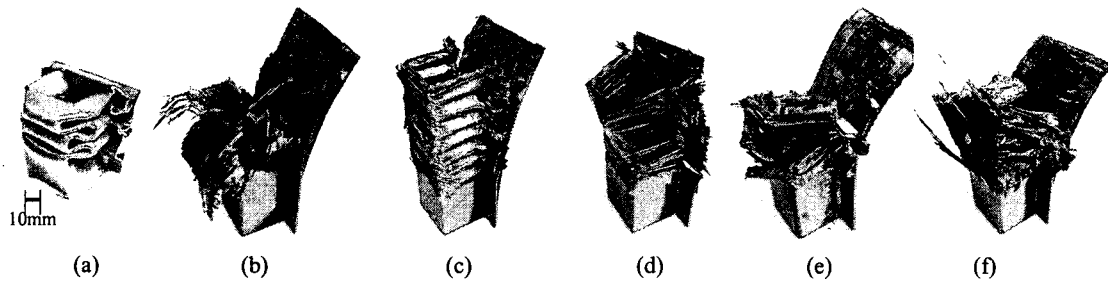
The Collapse mode of specimens: (a) spot welded member (b) CFRP side member, [+15/-15]₄ (c) CFRP side member, [+45/-45]₄ (d) CFRP side member, [90]₈ (e) CFRP side member, [0/90]₄ (f) CFRP side member, [90/0]₄
